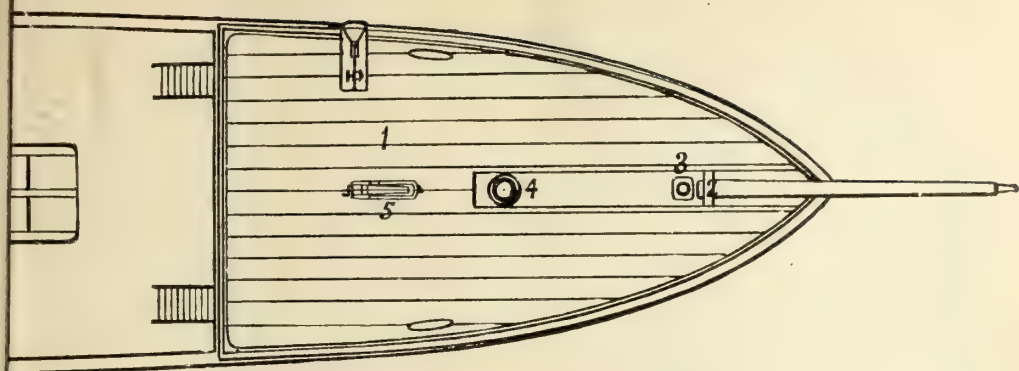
PLAN OF POOP-HOUSE & FORECASTLE DECKS.
